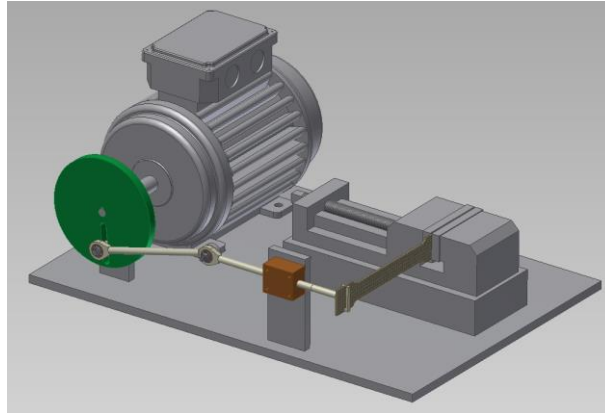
First model of the bending fatigue test machine with crank mechanism
